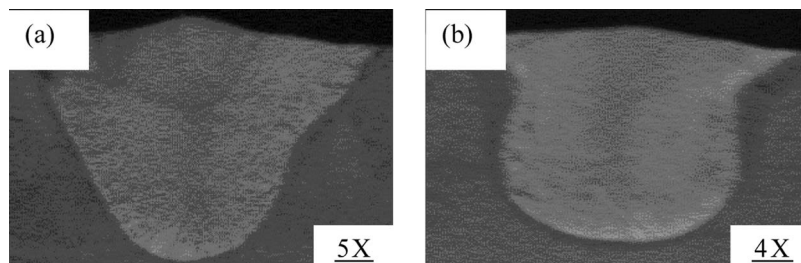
Actual cross-sections of the 316LN stainless steel weld produced by A-TIG welding (a) Case I (b) Case II.
